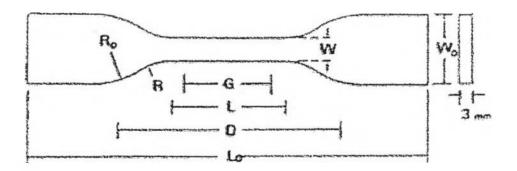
Dimension of tensile test specimen (TypeIV)
